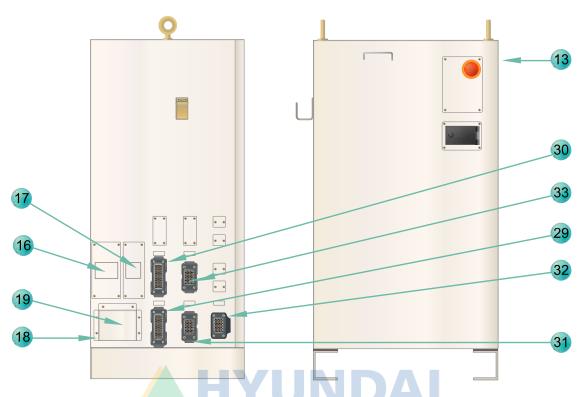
Hi5-C10 Part arrangement parts in the exterior of the controller HEAVY INDUSTRIES CO., LTD.
